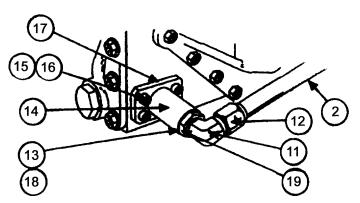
Adapter, Elbow and Oil Fill Tube Assembly.
